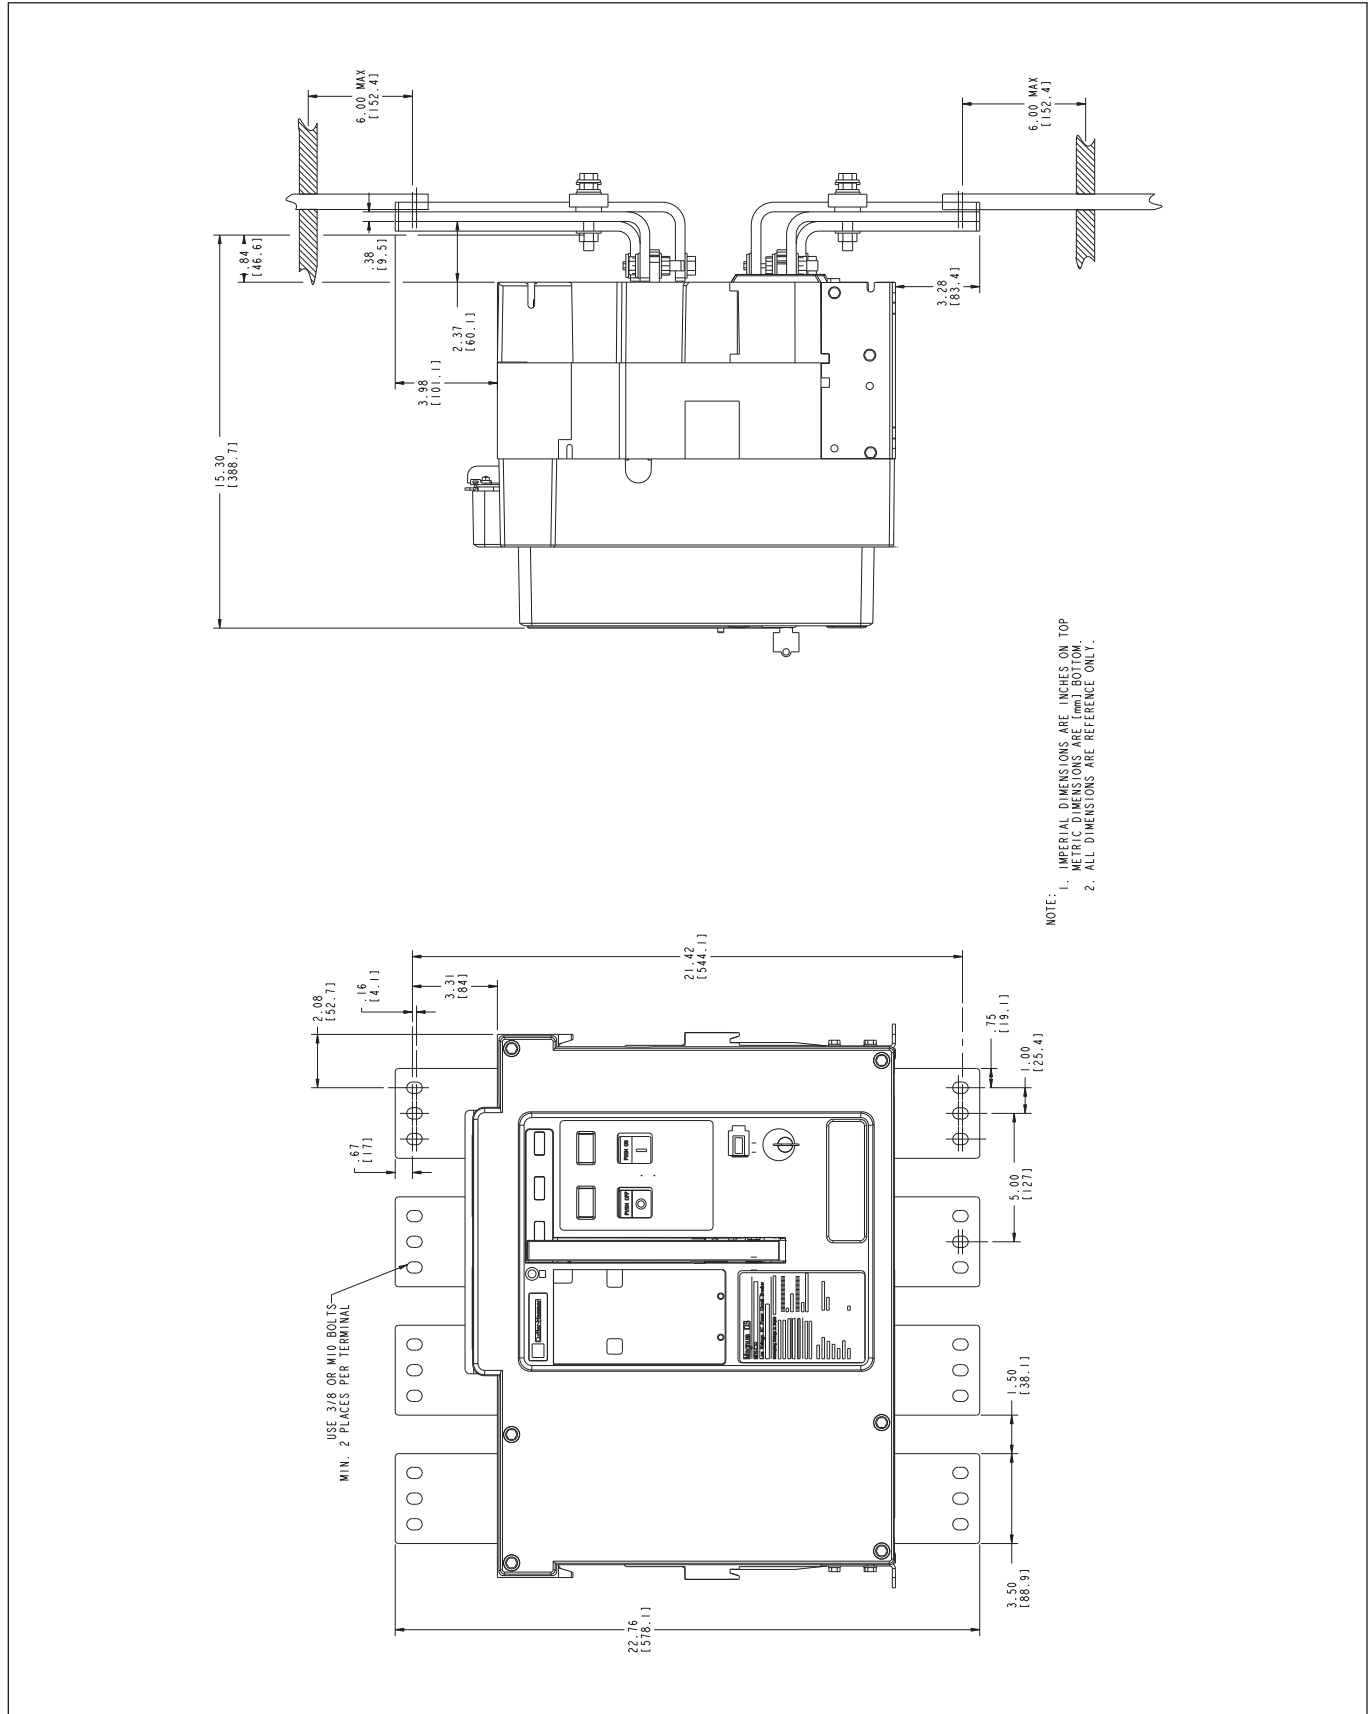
2000A Standard frame fixed breaker (Overall dimensions and mounting locations)
